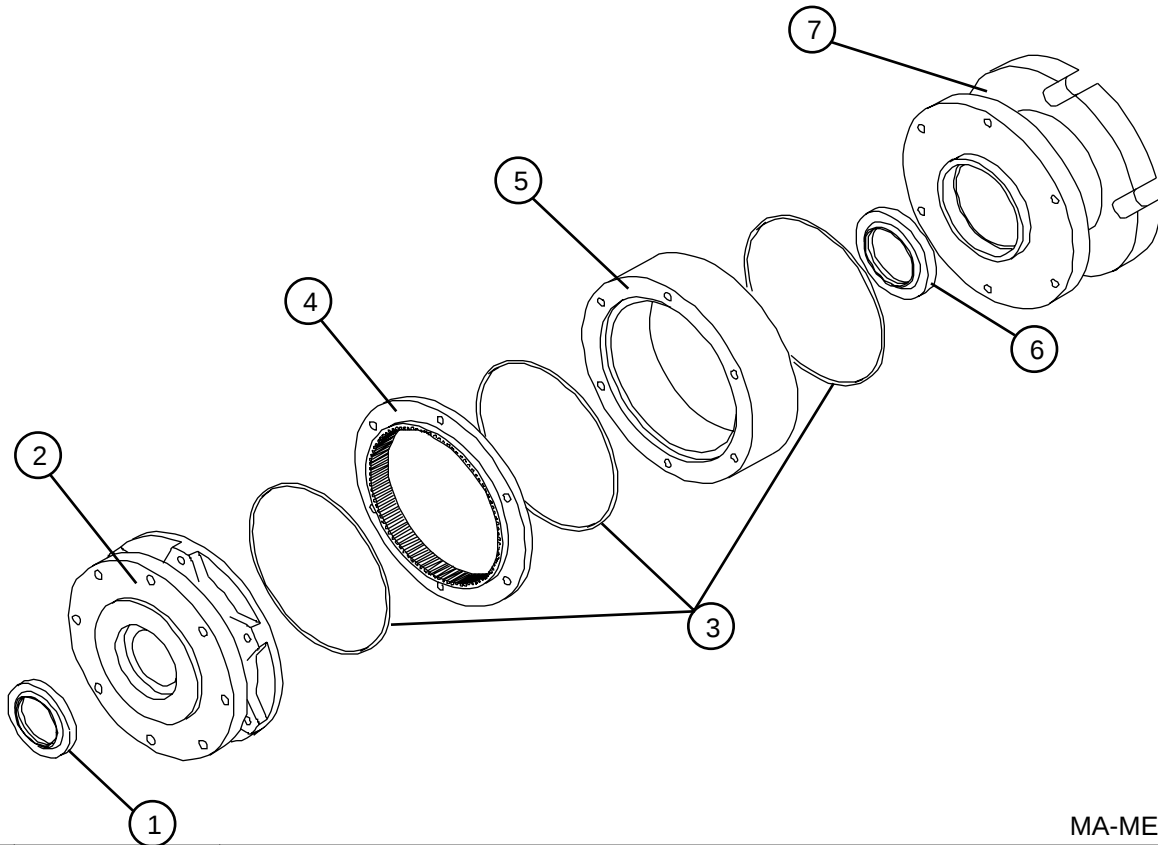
PLANETARY REDUCTION GEAR ASSEMBLY (Brevini)
